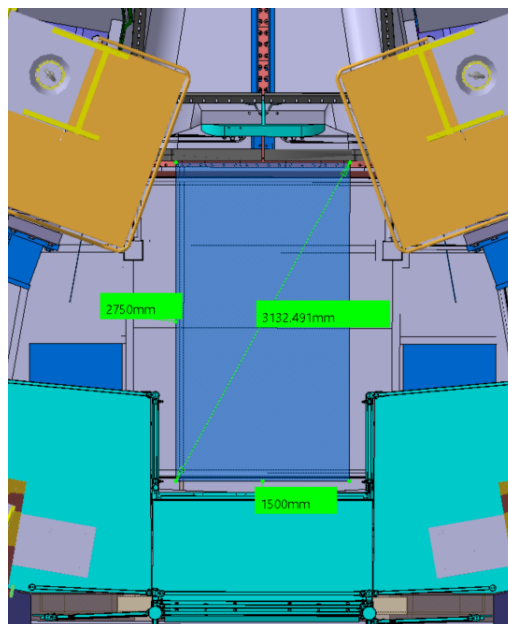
Top view of the free area to lower equipment with overhead crane 1.5m*2.75m
